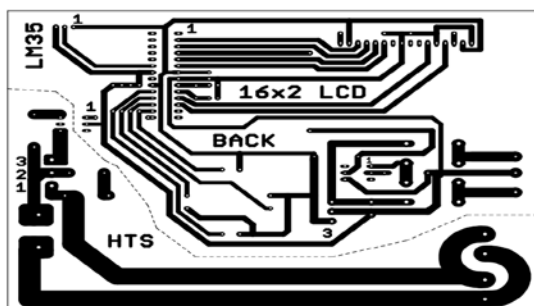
Printed Circuit Board (PCB) design for fabrication of the project.
